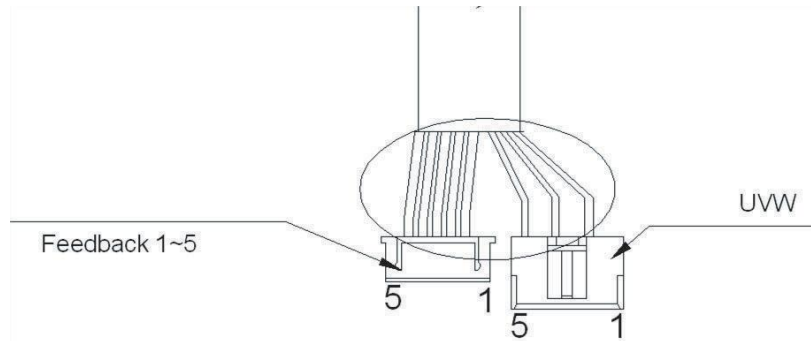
Outdoor DC Fan Motor (DC motor that controls the chip on the PCB)
